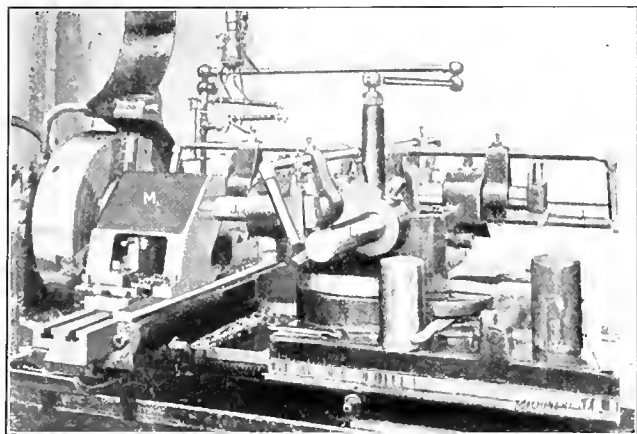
Turning and Facing the Outside of the Bowl with Supported Tool-holders of Special Construction
